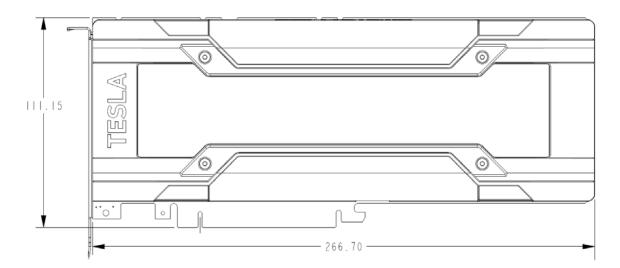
Tesla V100 PCIe Board Dimensions (With Optional I/O Bracket)
